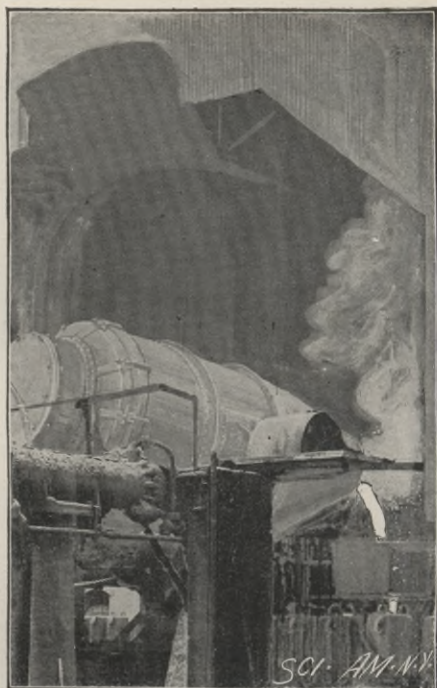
Bessemer converter pouring finished molten steel into its proper ladle; from the ladle, molten steel is flowing to the ingot mold below.
